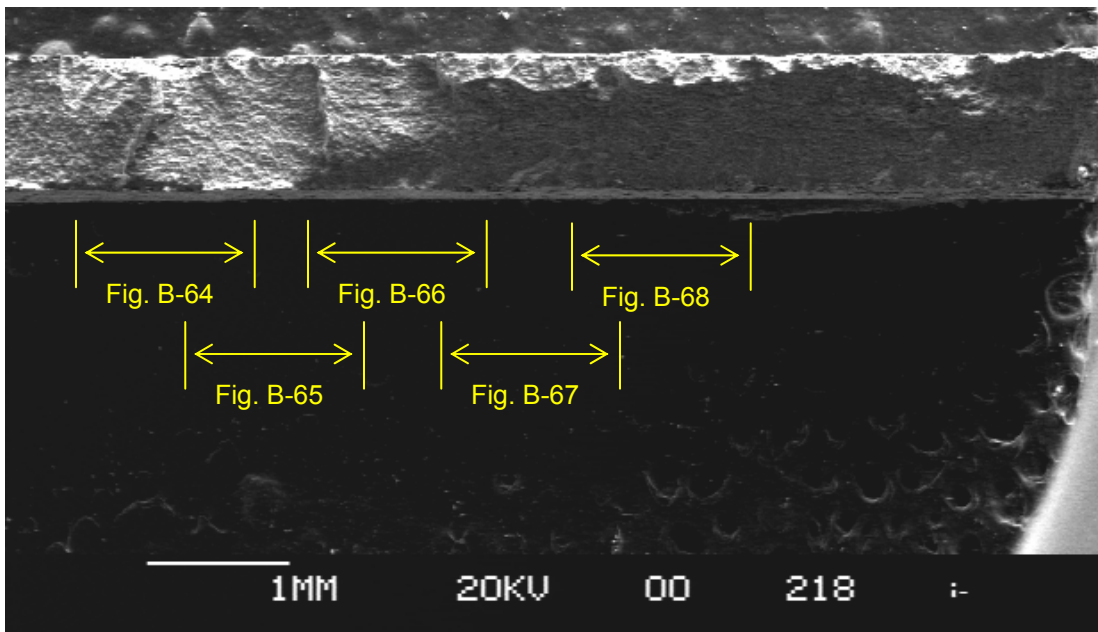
Fatigue Crack on Fracture Surface of Specimen 5896.
